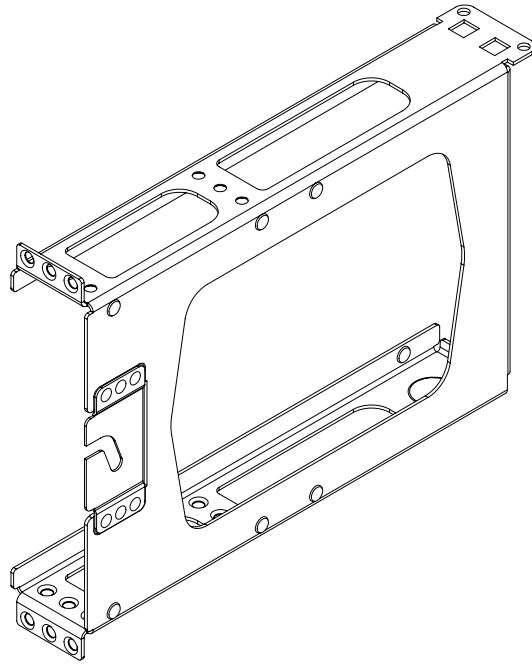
GTX 33 Modular Rack (115-00438-00)
